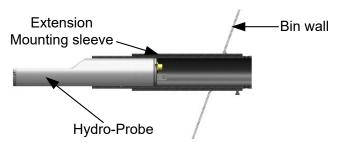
Hydro-Probe installed in an Extension Mounting Sleeve
